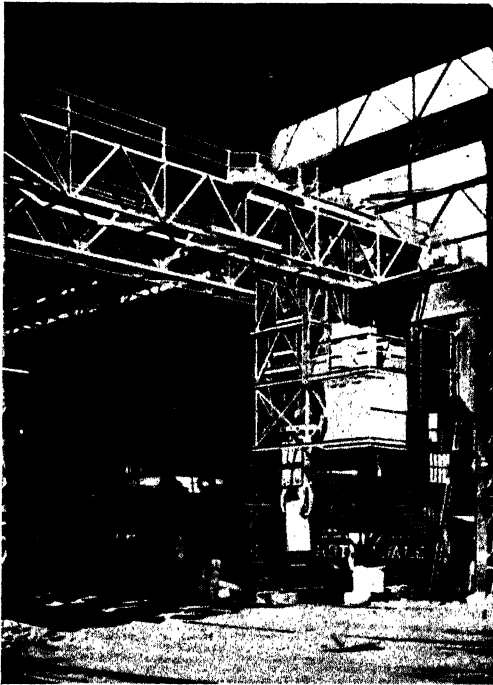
A 5-ton Ingot Stripping and Charging Machine.
